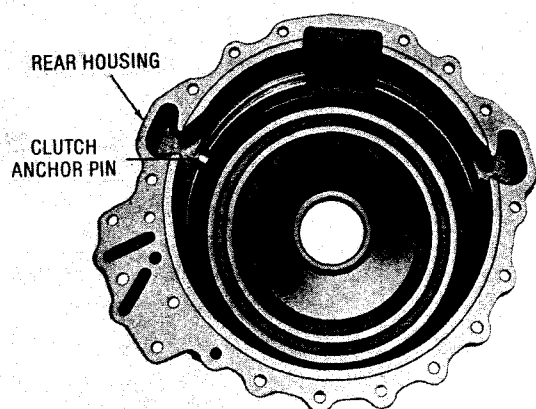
Rear housing and piston assembly (TRT 2221-1, 2421-1)
